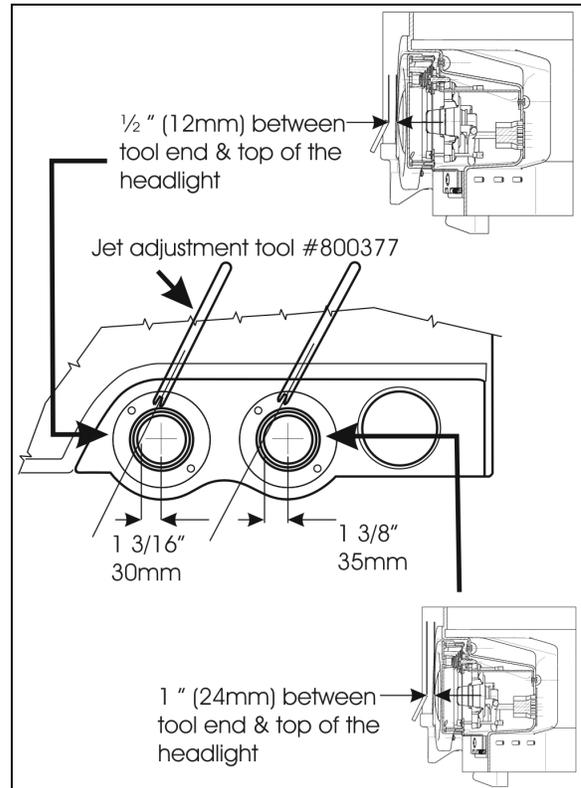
WASHER NOZZLES ADJUSTMENT
